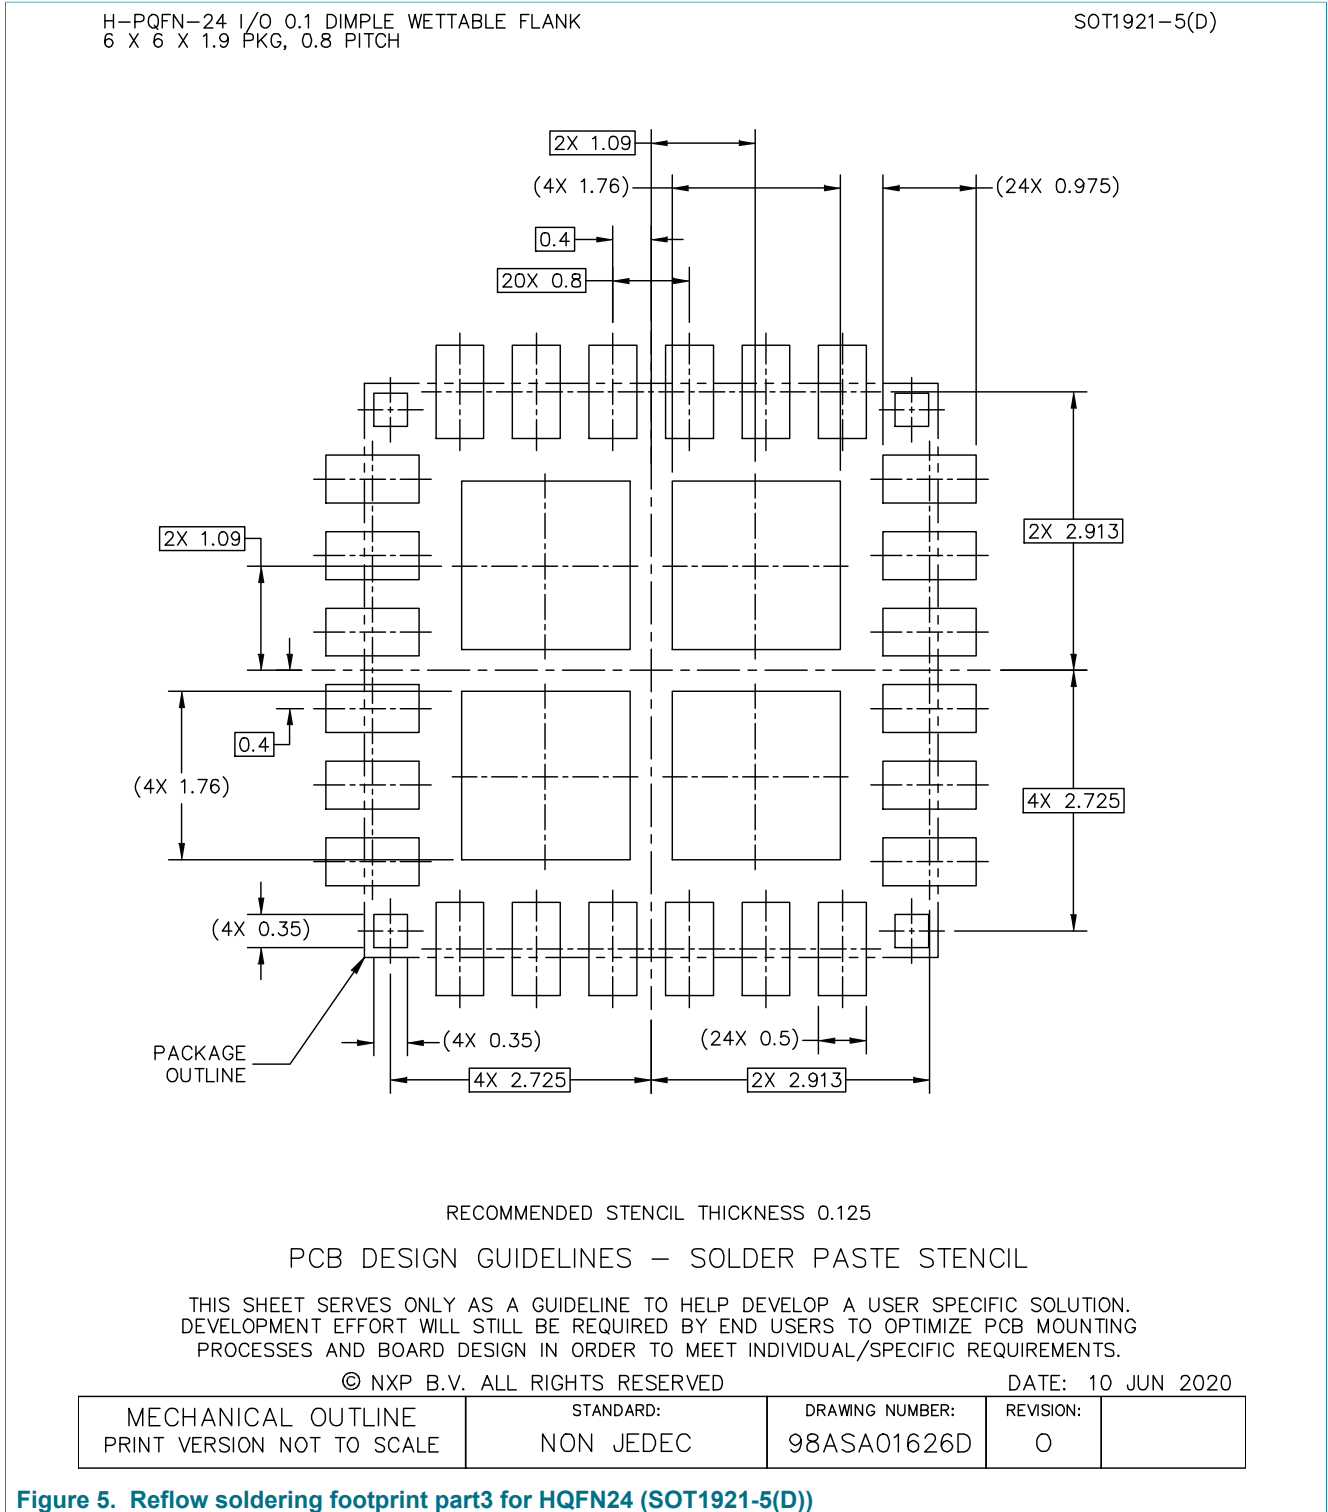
Reflow soldering footprint part3 for HQFN24 (SOT1921-5(D))
